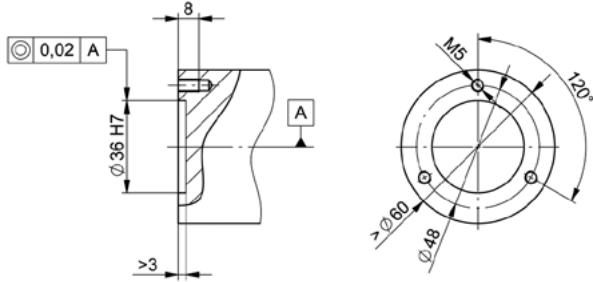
Mounting flange for installing crank angle encoder Type 2614C11
